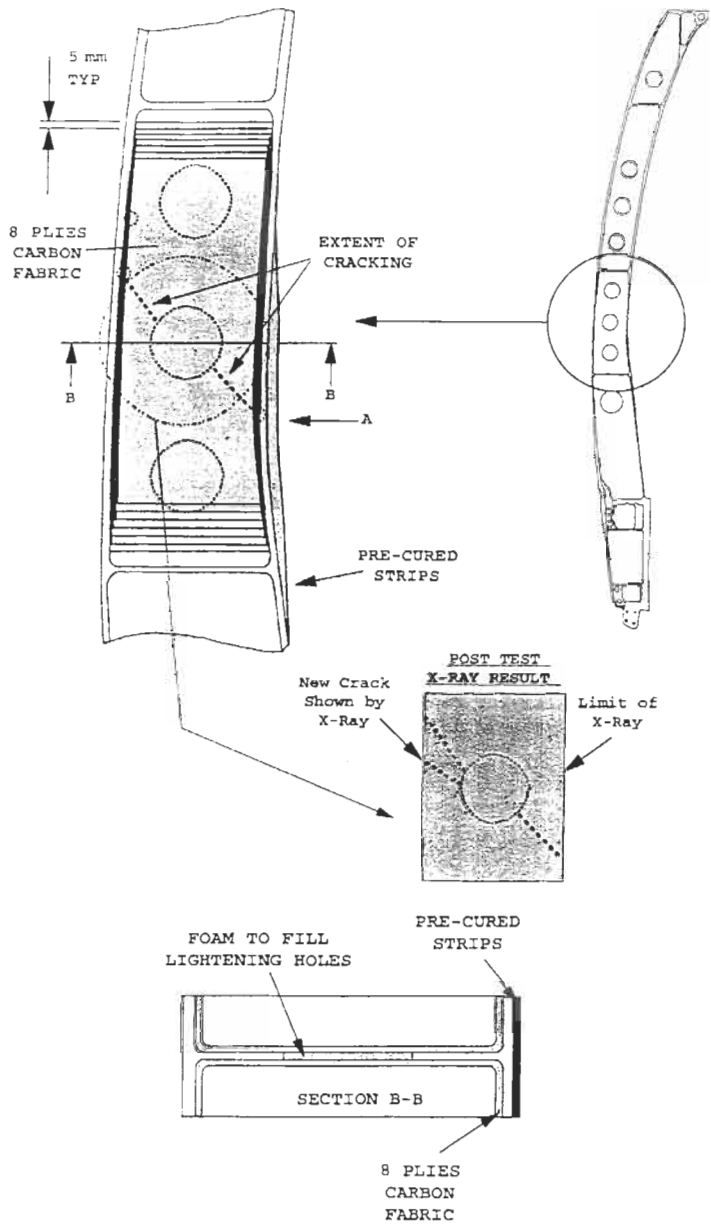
Repair details of X8875 port side frame WL2121 unflanged lightening hole failure.
